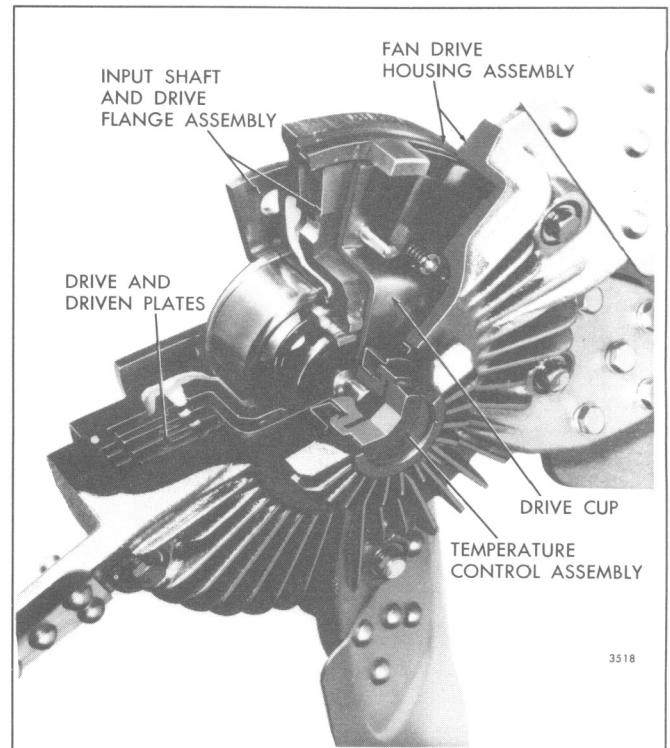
Typical Thermo-Modulated Fan Drive Assembly
